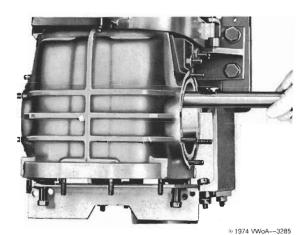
Gear train being pressed out. Notice the piece of angle iron installed across the transmission case. This provides support for removal tool VW 296, being used to lever out the gear train.
